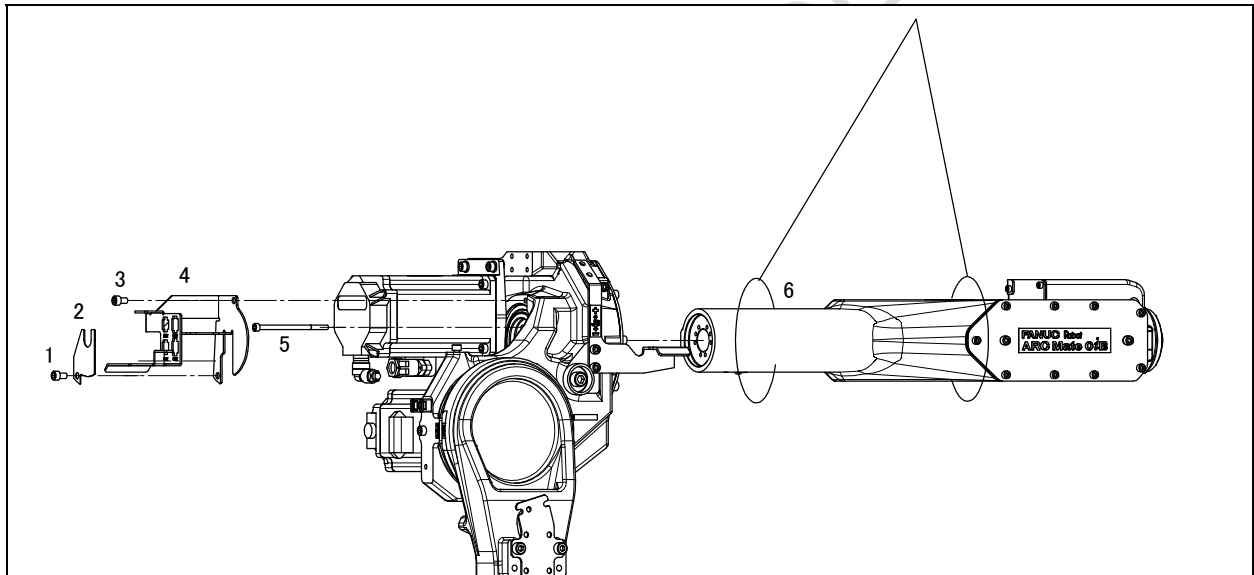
(a) Replacing the J4-axis gearbox (1/2)
